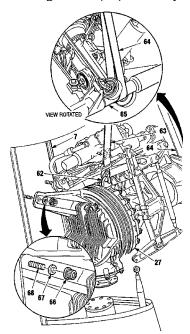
Tail Rotor Gearbox Assembly Removal/Installation
